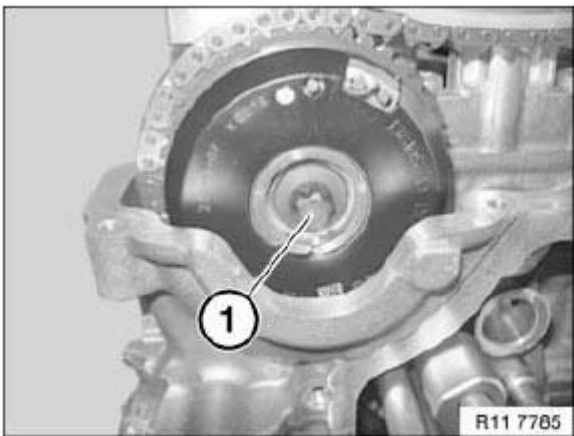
Identifying Central Bolt Of Inlet Adjustment Unit
